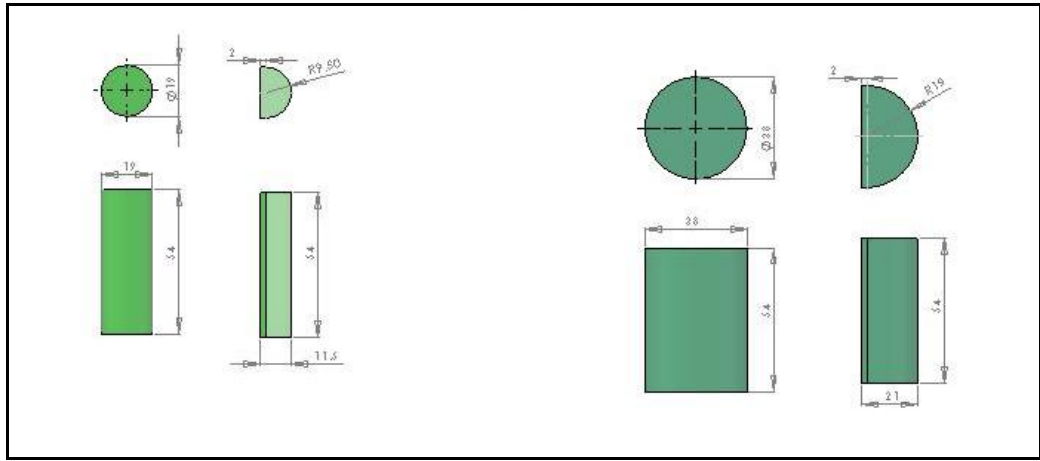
Circular and semi-circular tubes for both 38 mm and 19 mm in diameter
